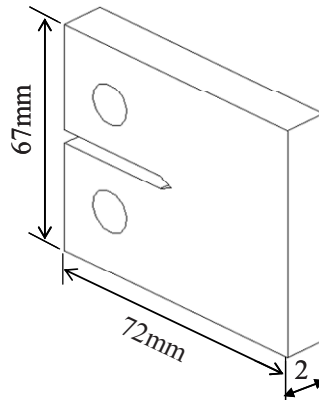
Geometry and dimensions in millimetres of specimen used in fatigue tests.
